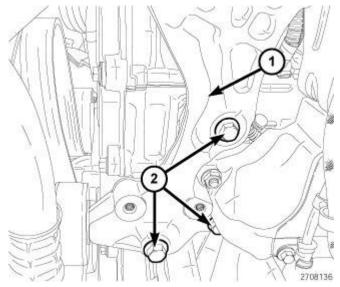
GENERATOR MOUNTING BRACKET & BOLTS Courtesy of CHRYSLER LLC
